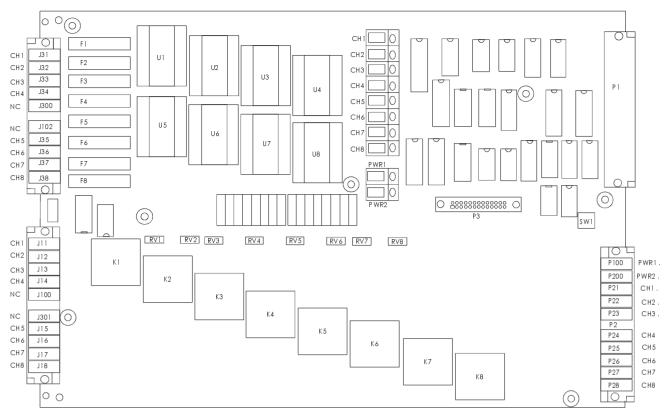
HP E6178B 8-Channel Heavy Duty Load Card Component Locator
